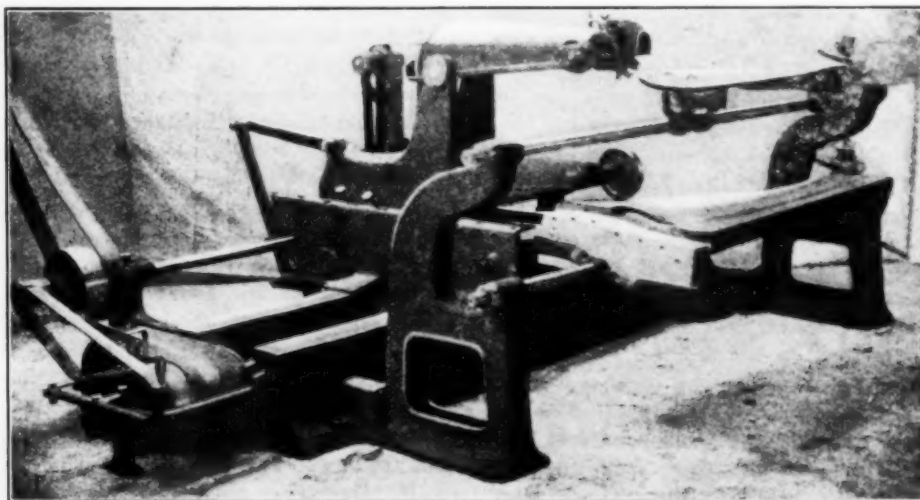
WADKIN PROPELLER-SHAPING MACHINE
